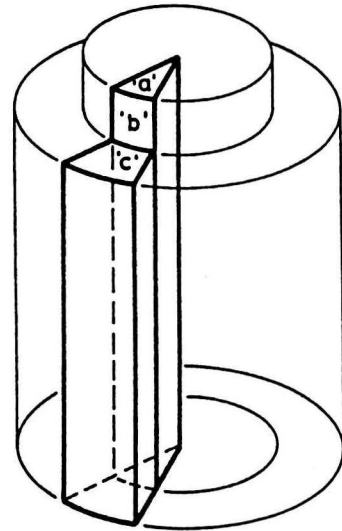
Acylindrical workpiece, being deformed by a radially configured tool
